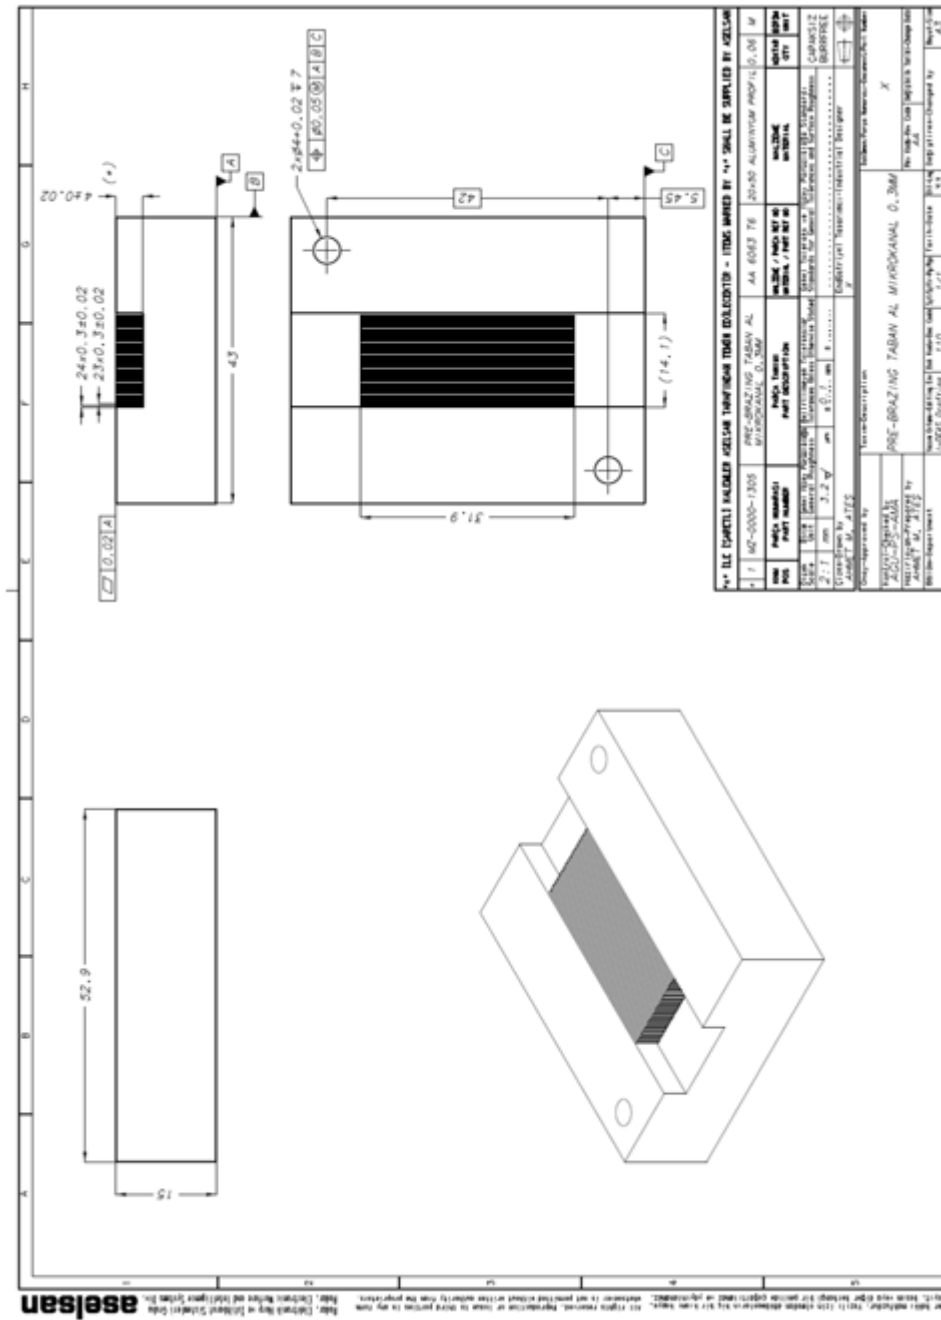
Technical drawings of 300 micron wide uninterrupted channel
